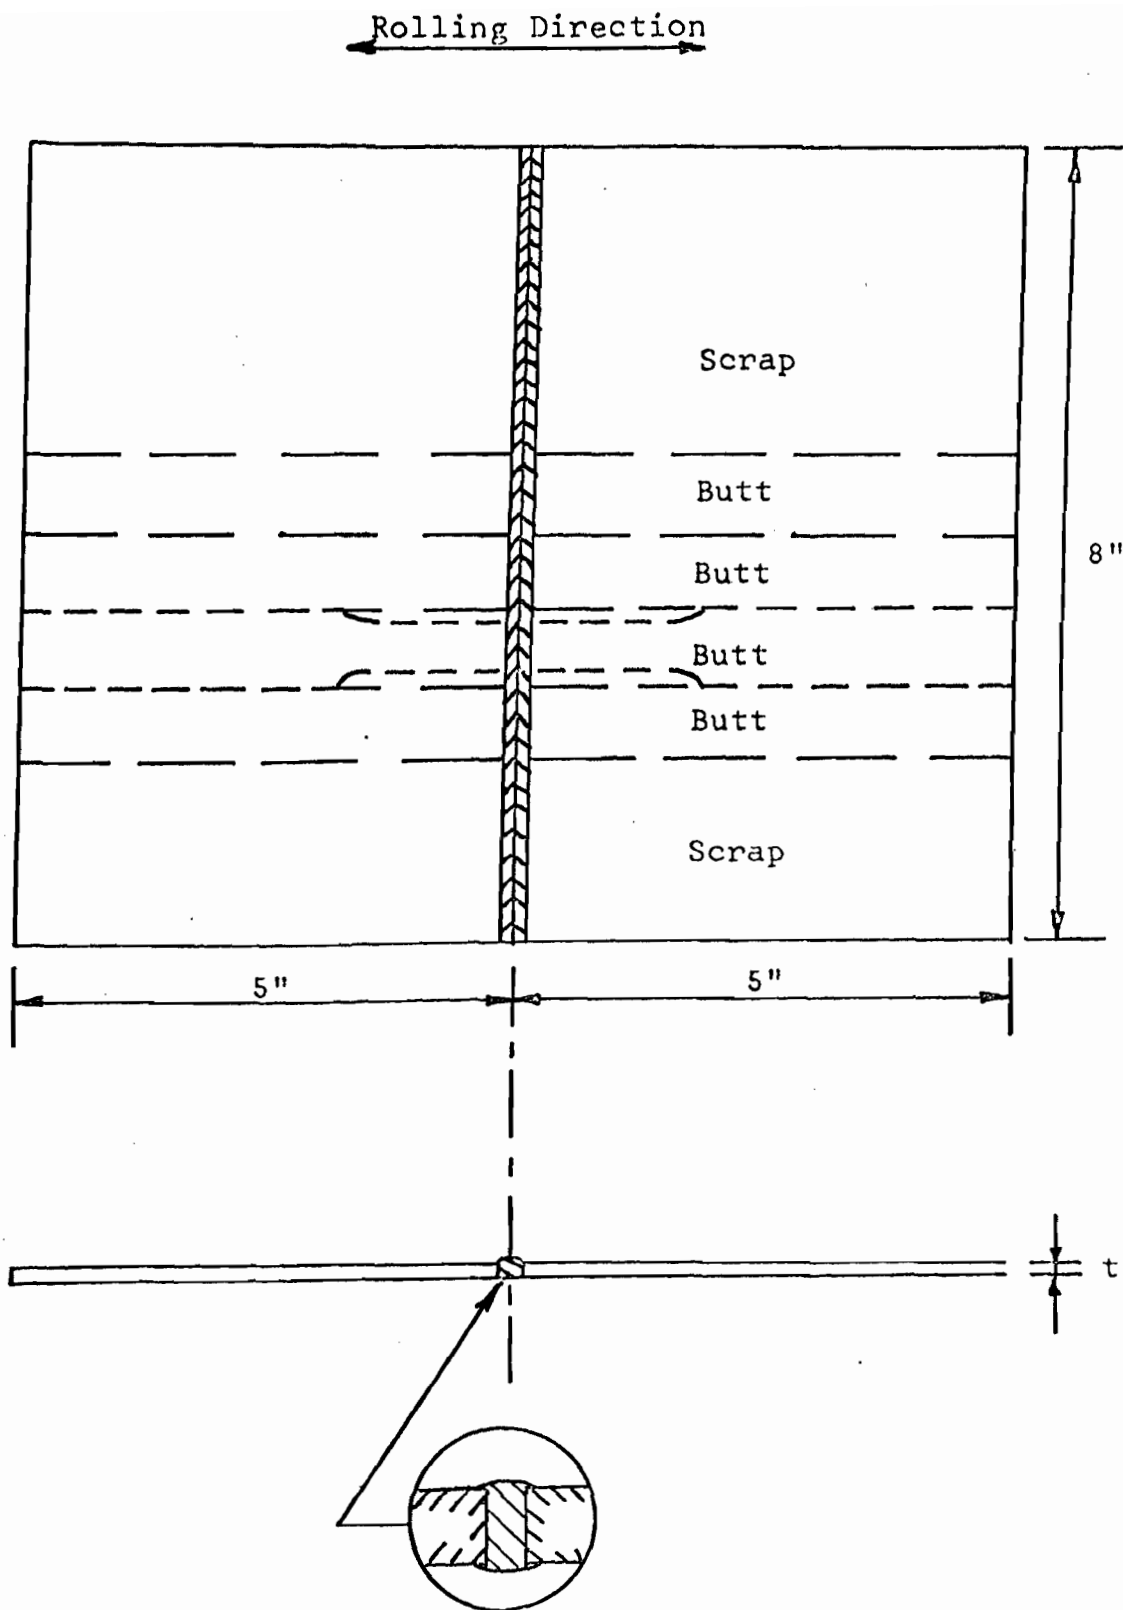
Fabrication of Butt-Joint, Groove-Weld Specimens
